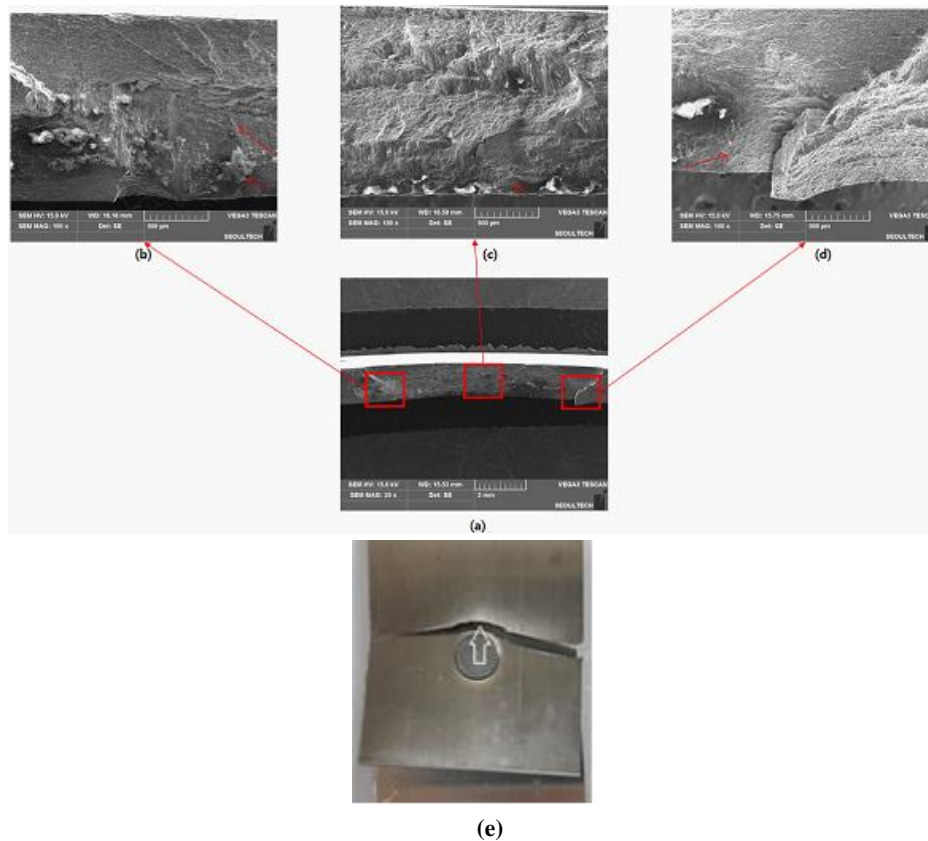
Fatigue fracture surfaces of the specimen under $P_{amp} = 1000$ N
